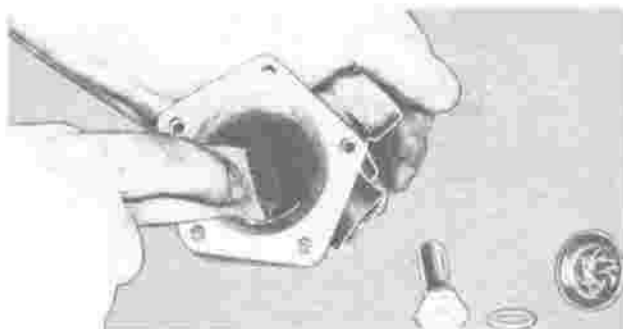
(Sheet 6 of 61)—Heater Assembly
